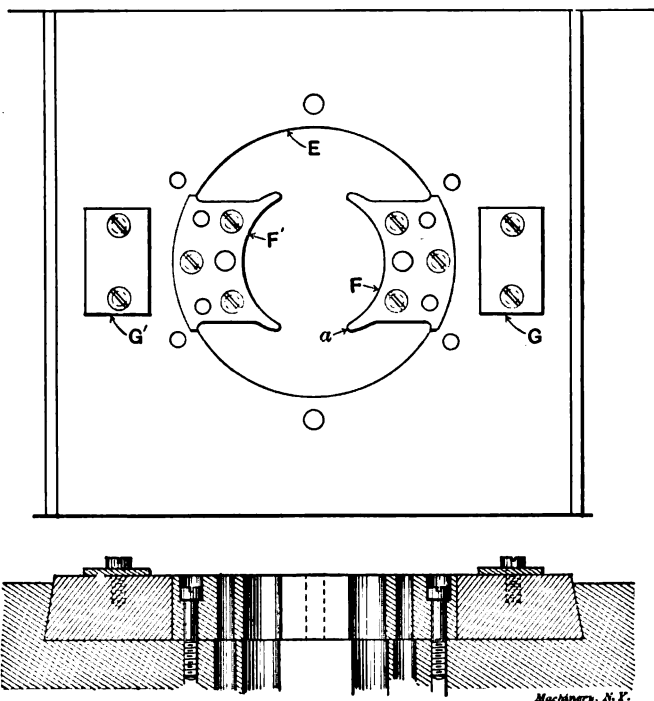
Die for Inside Shape and Holes of Blank in Fig. 38
